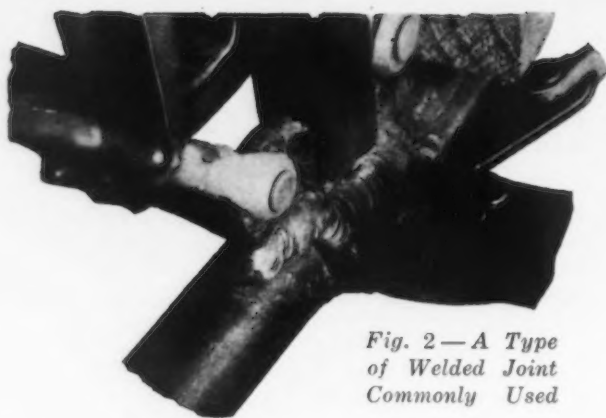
A Type of Welded Joint Commonly Used
